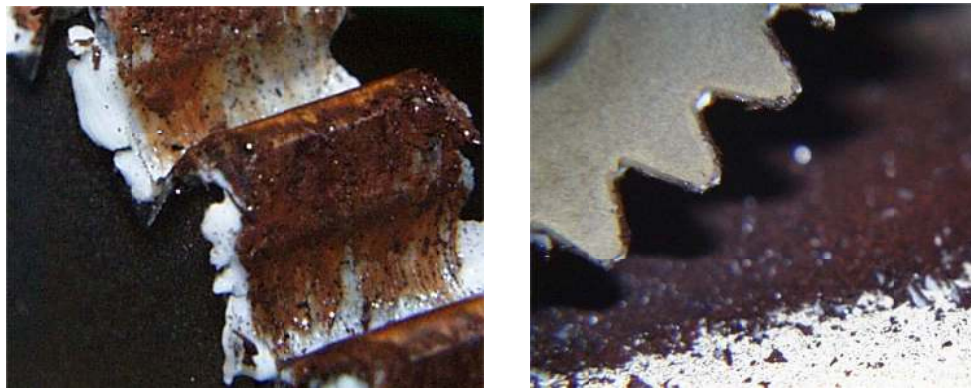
Left: shows rust forming on the gear profile. Right: shows rust debris from metal contact. (Both photos from a 2.12 module (12-diametral pitch) gear test.)
